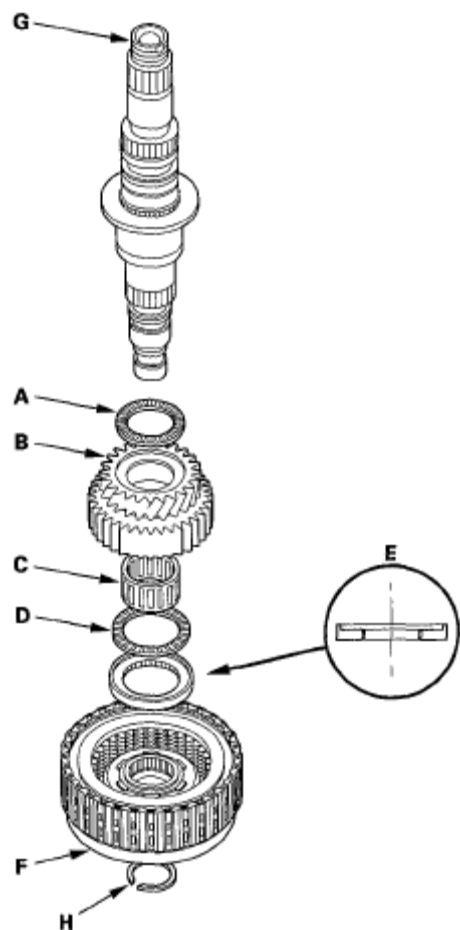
Identifying Thrust Needle Bearing, 1st Gear, Needle Bearing And Thrust Needle Bearing
